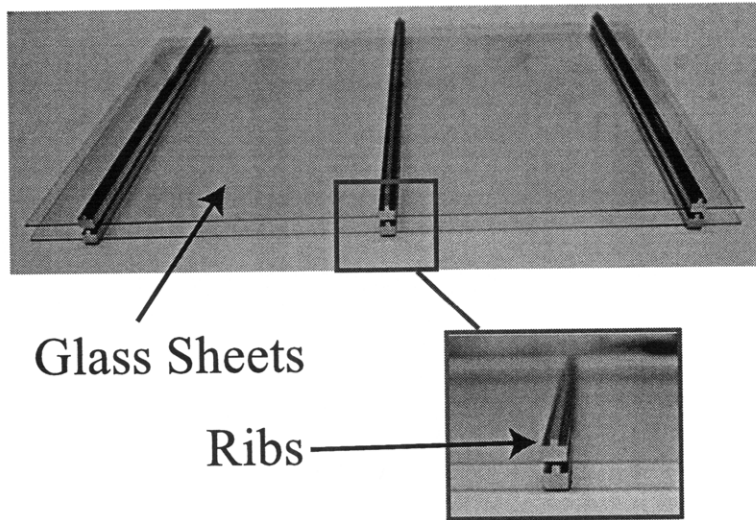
Glass sheets (140 mm x 100 mm x 0.4 mm) assembled utilizing 3 aluminum ribs with a T cross-section. The x-ray reflecting surface is in contact with the shorter edge of the T-rib.
